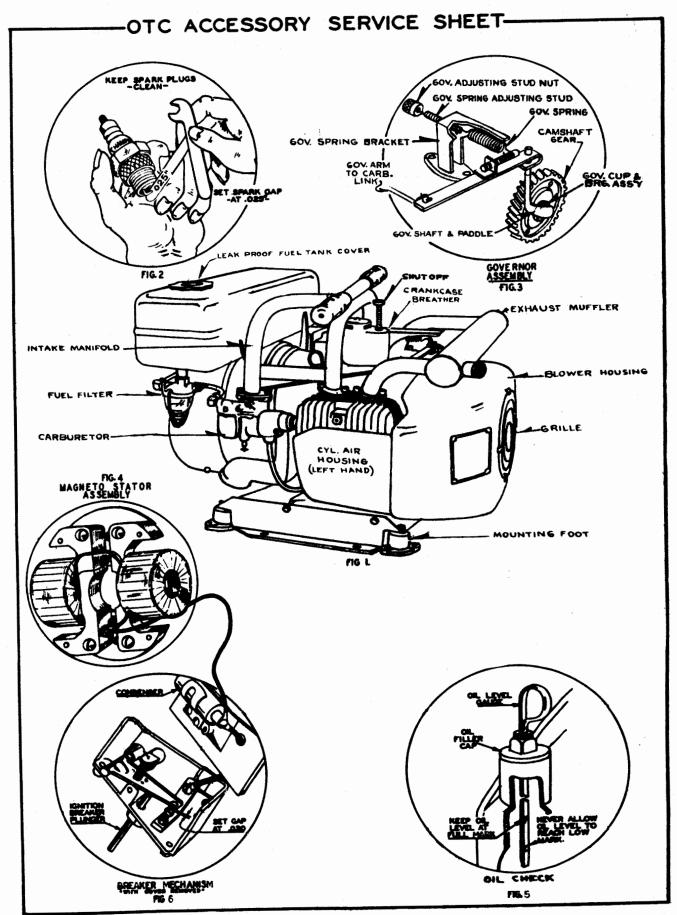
Accessory Service Drawing for Engine Generator Set Type CD0-73004-A.
